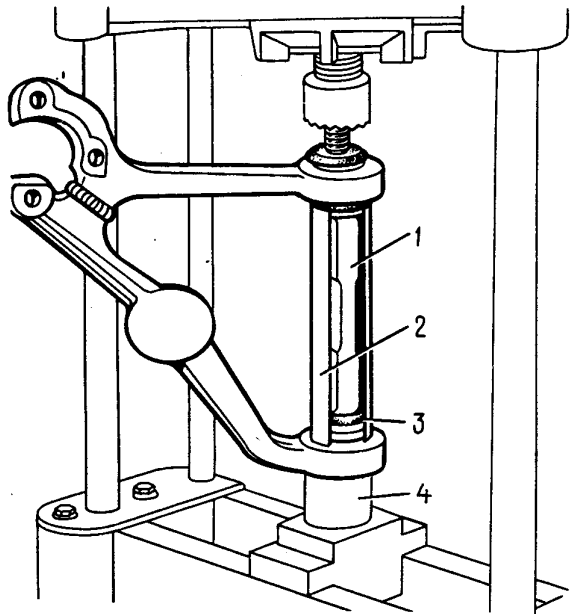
Pressing Out Upper Wishbone Silent Blocks:
